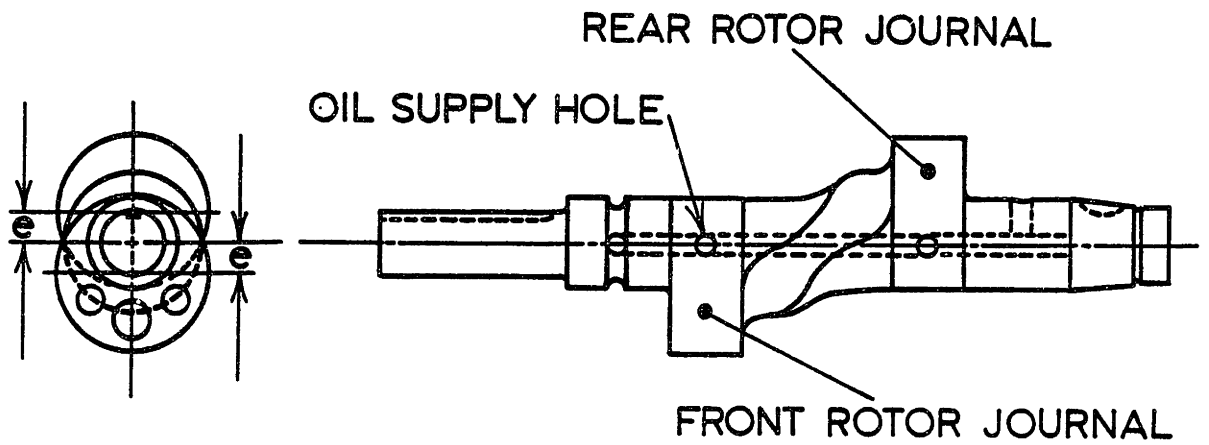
Side and end views of shaft and rotor showing basic engine dimensions.
